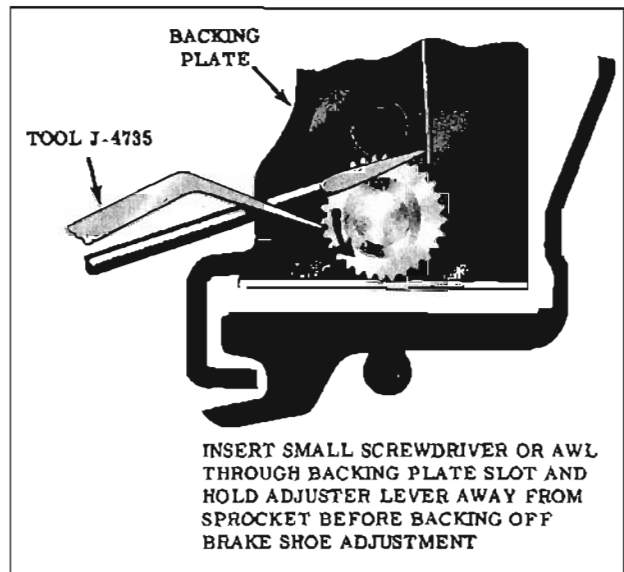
Backing Off Brake Shoe Adjustment (30, 31, 32 & 33 Series)
